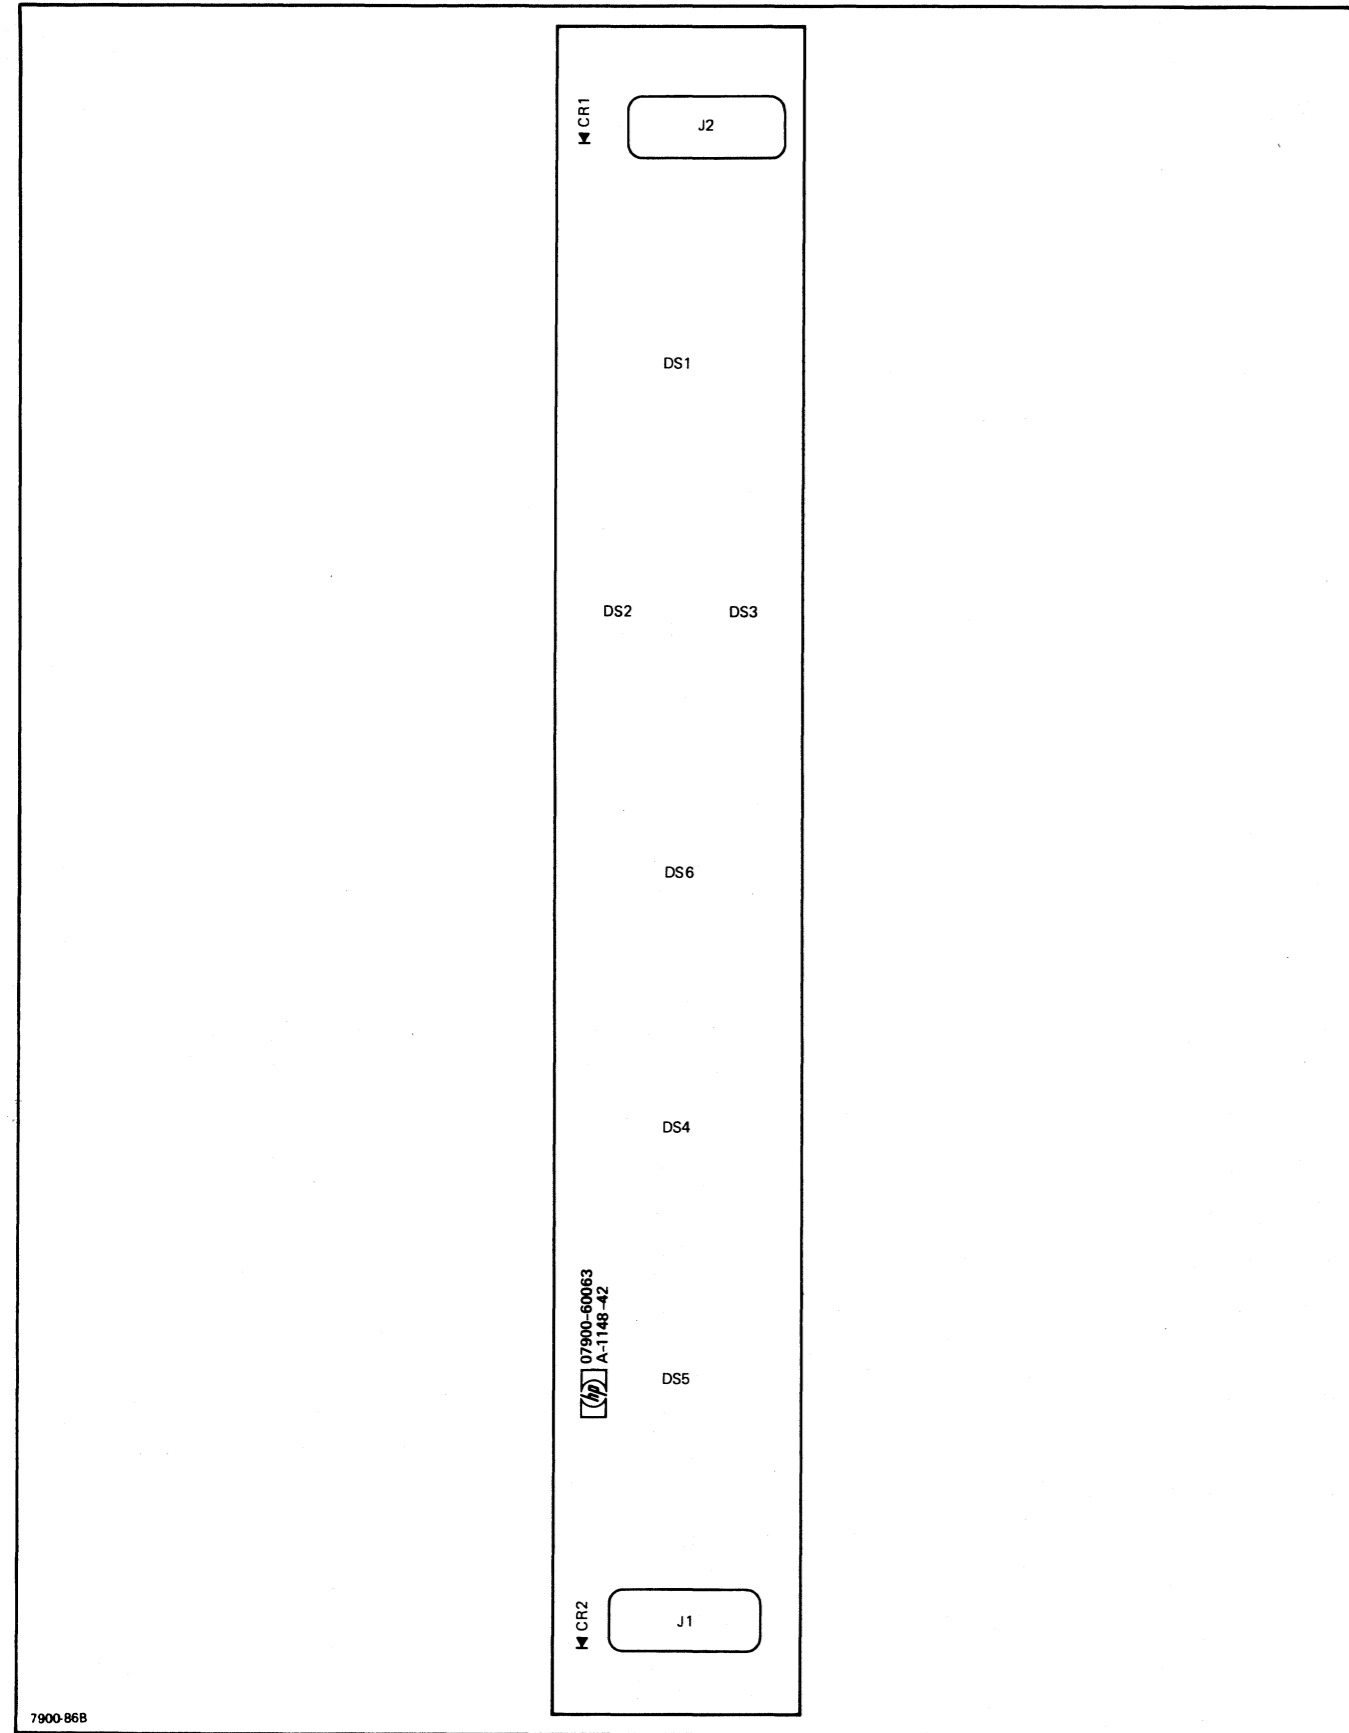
Indicator Assembly A1 Parts Location Diagram
